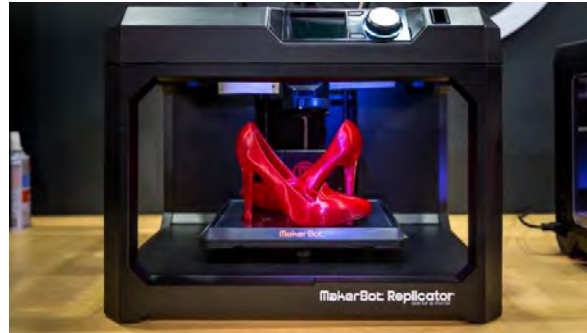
Example of 3D Printing Machine (www.tested.com)
